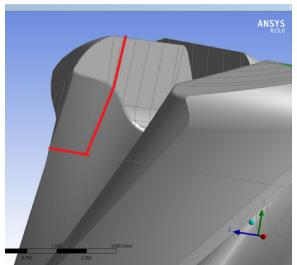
The contact zone of the mill tooth front surface with the cuttings
